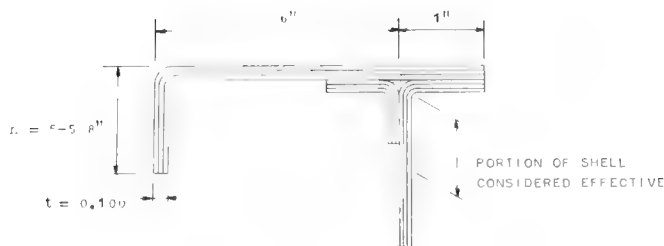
Gunwale - assumed cross-section for horizontal loading
